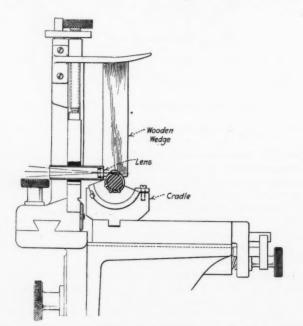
METHOD OF HOLDING SCREW IN PLACE FOR TESTING
